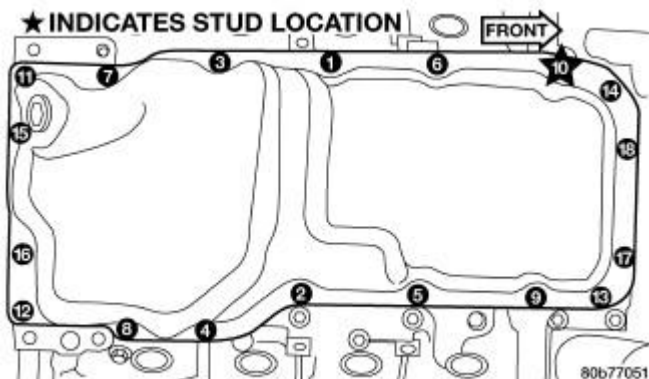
Oil Pan Bolt Removal/Tightening Sequence
